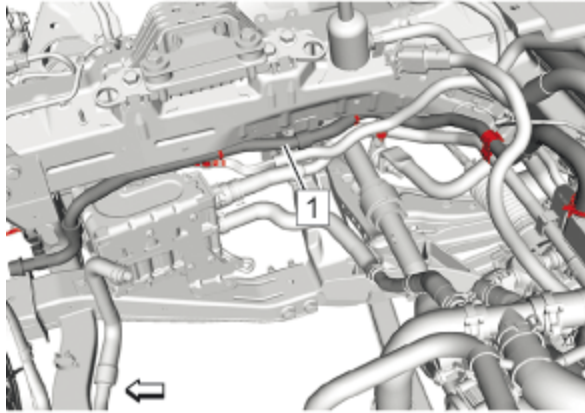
Drive Motor Battery Coolant Cooler Inlet Hose
